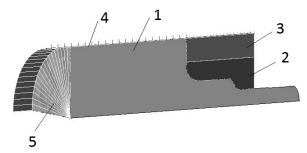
Exemplary geometrical model of the analyzed extrusion process: 1 – formed material, 2 – die insert, 3 – prestressing ring, 4 – container surface, 5 – punch surface
